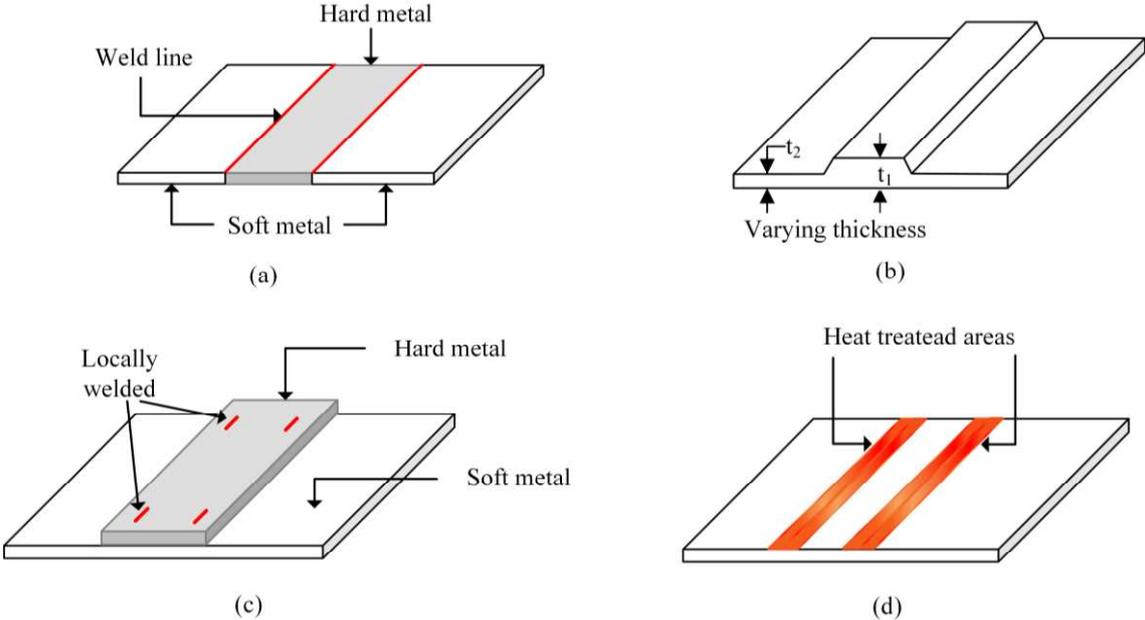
Tailored blanks. (a) Tailor welded blanks (b) Tailor rolled blanks (c) Patchwork blanks (d) Tailor heat treated blanks
